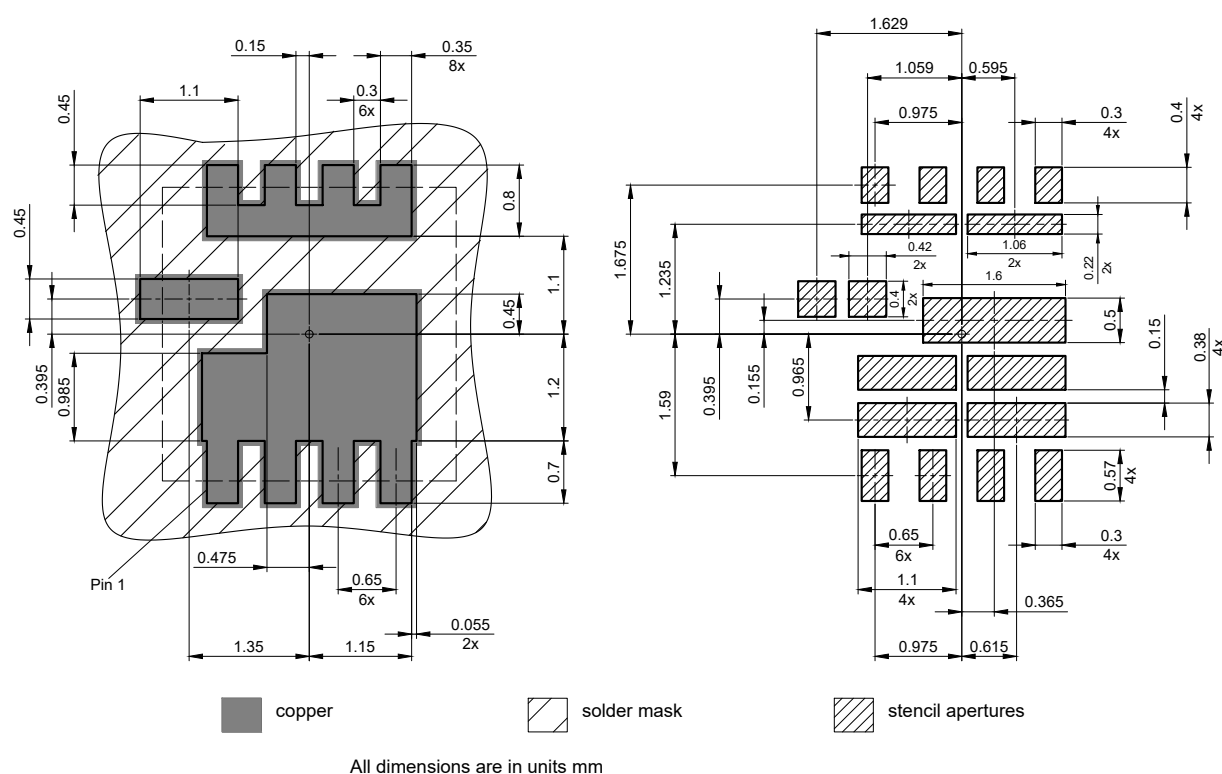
Footprint drawing PG-WHTFN-9, dimensions in mm
